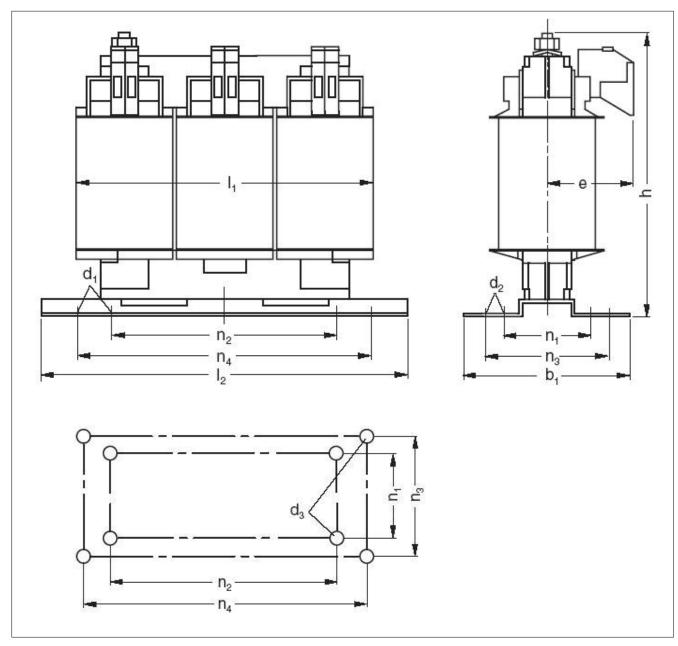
Dimension drawing and mounting hole of motor reactor 9 A (6SL3000-2BE21-0AA0)
